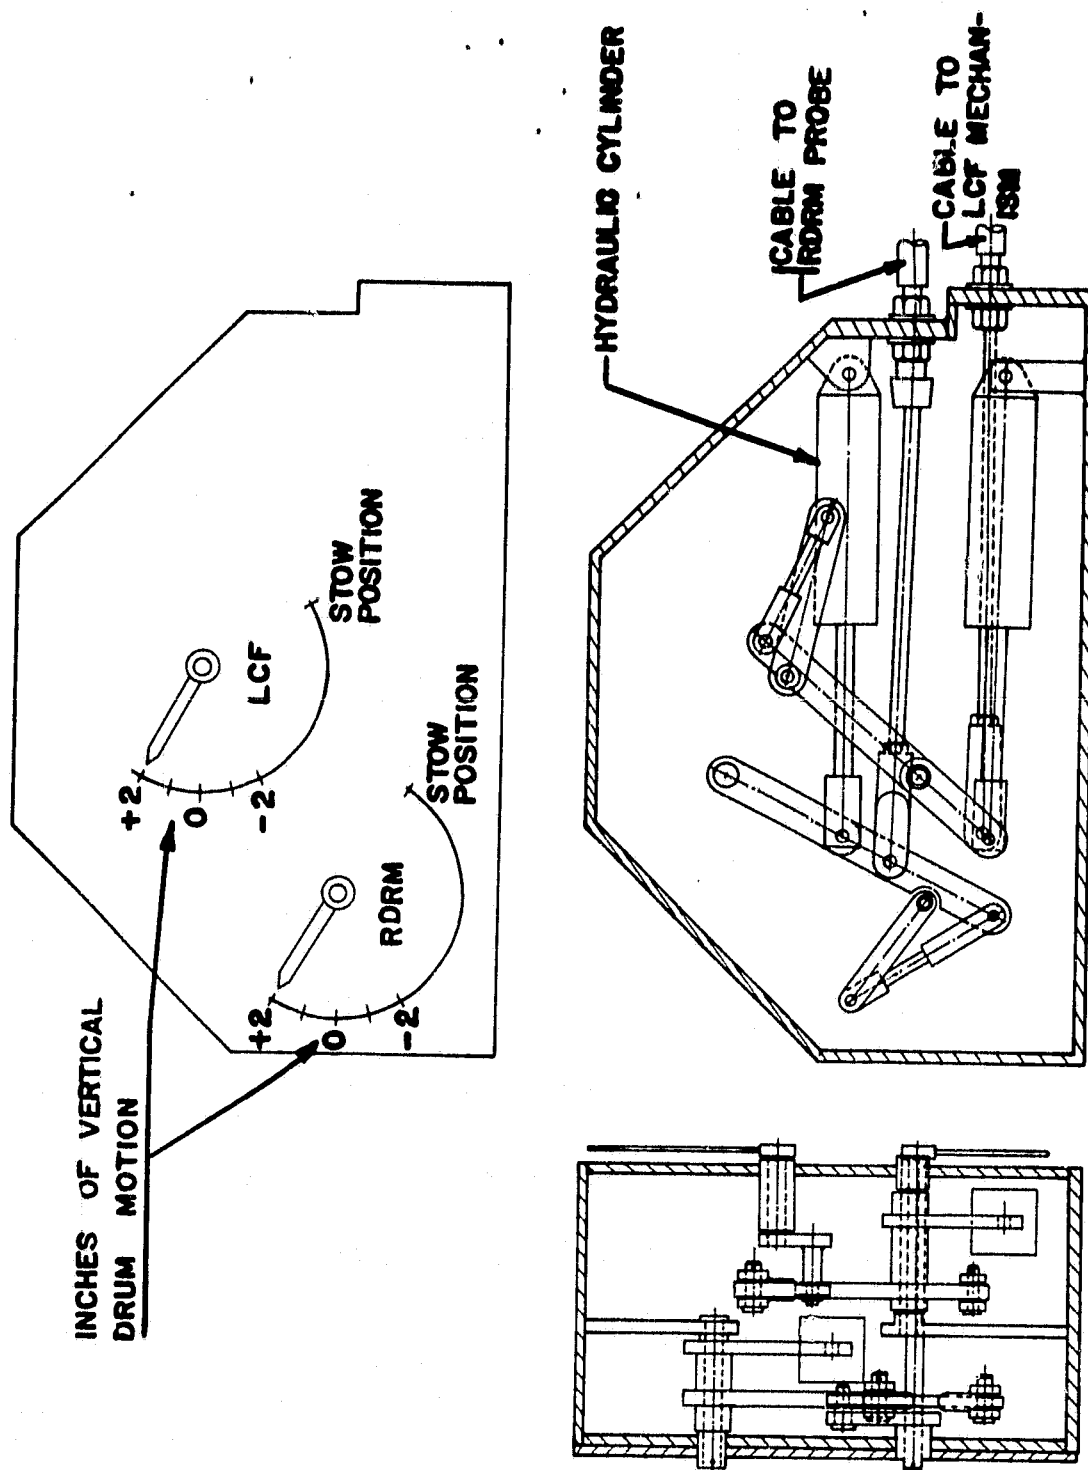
LINEARIZED FOUR-BAR LINKAGE ARRANGEMENT.
